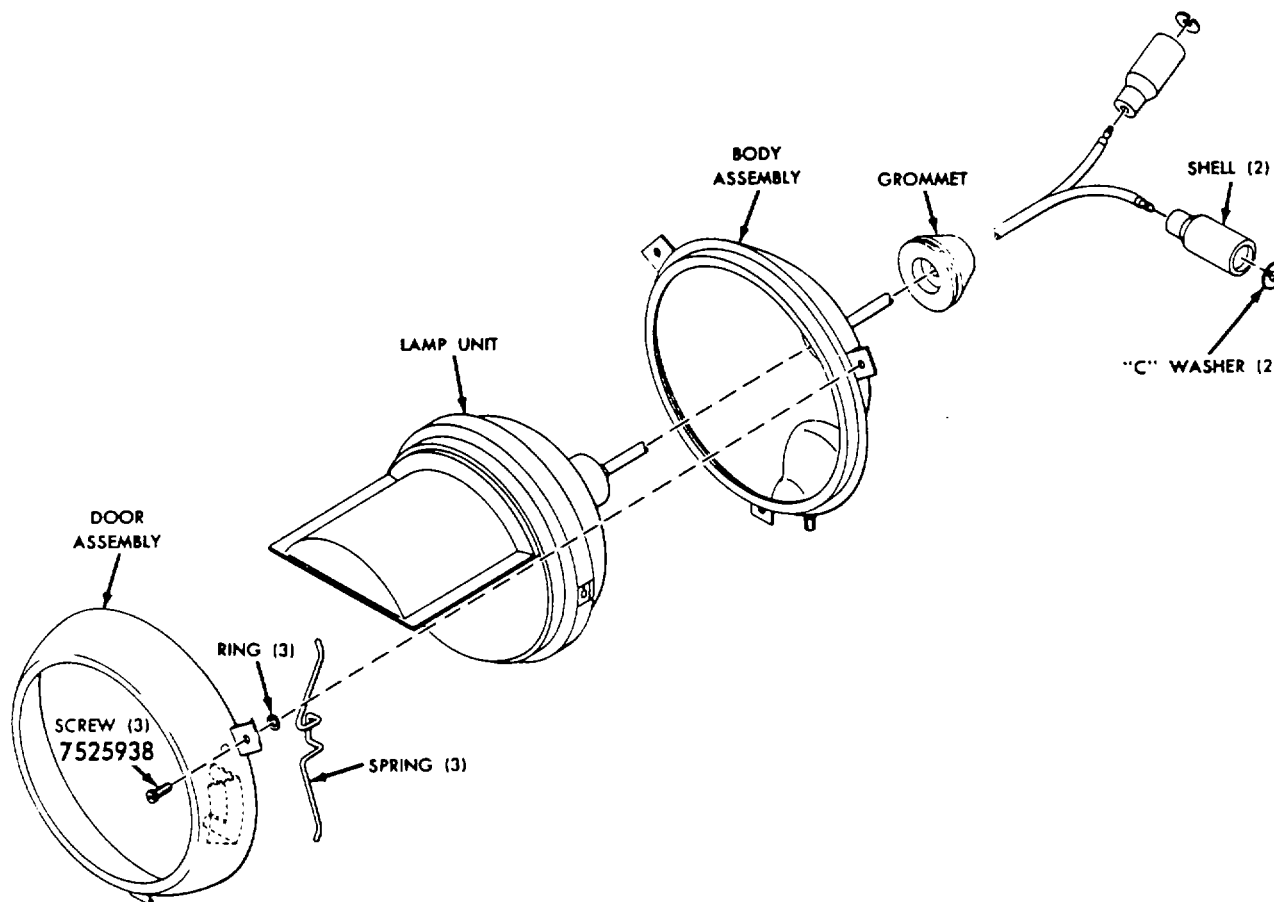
Disassembly of Blackout Headlamp Assembly
